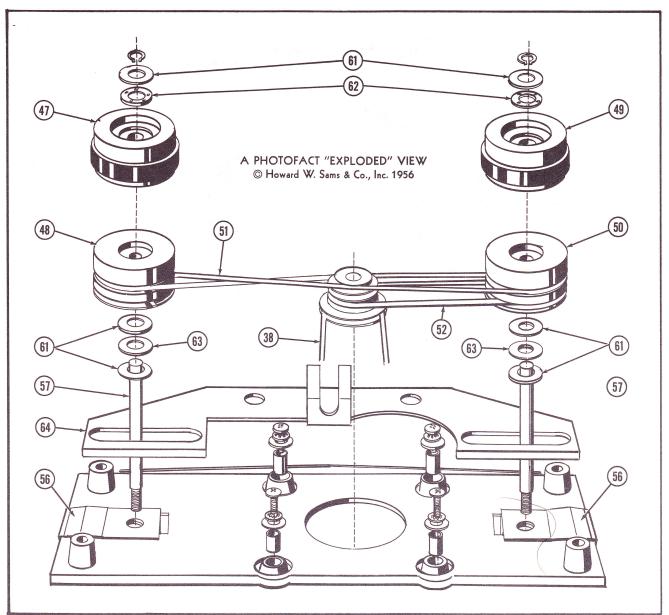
B. EXPLODED VIEW OF PARTS BELOW BASEPLATE.
